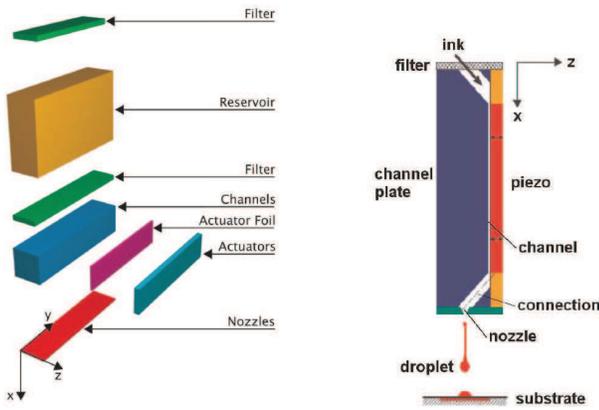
Exploded view of a piezoelectric inkjet printhead (left) and schematic representation of a single channel (right).
